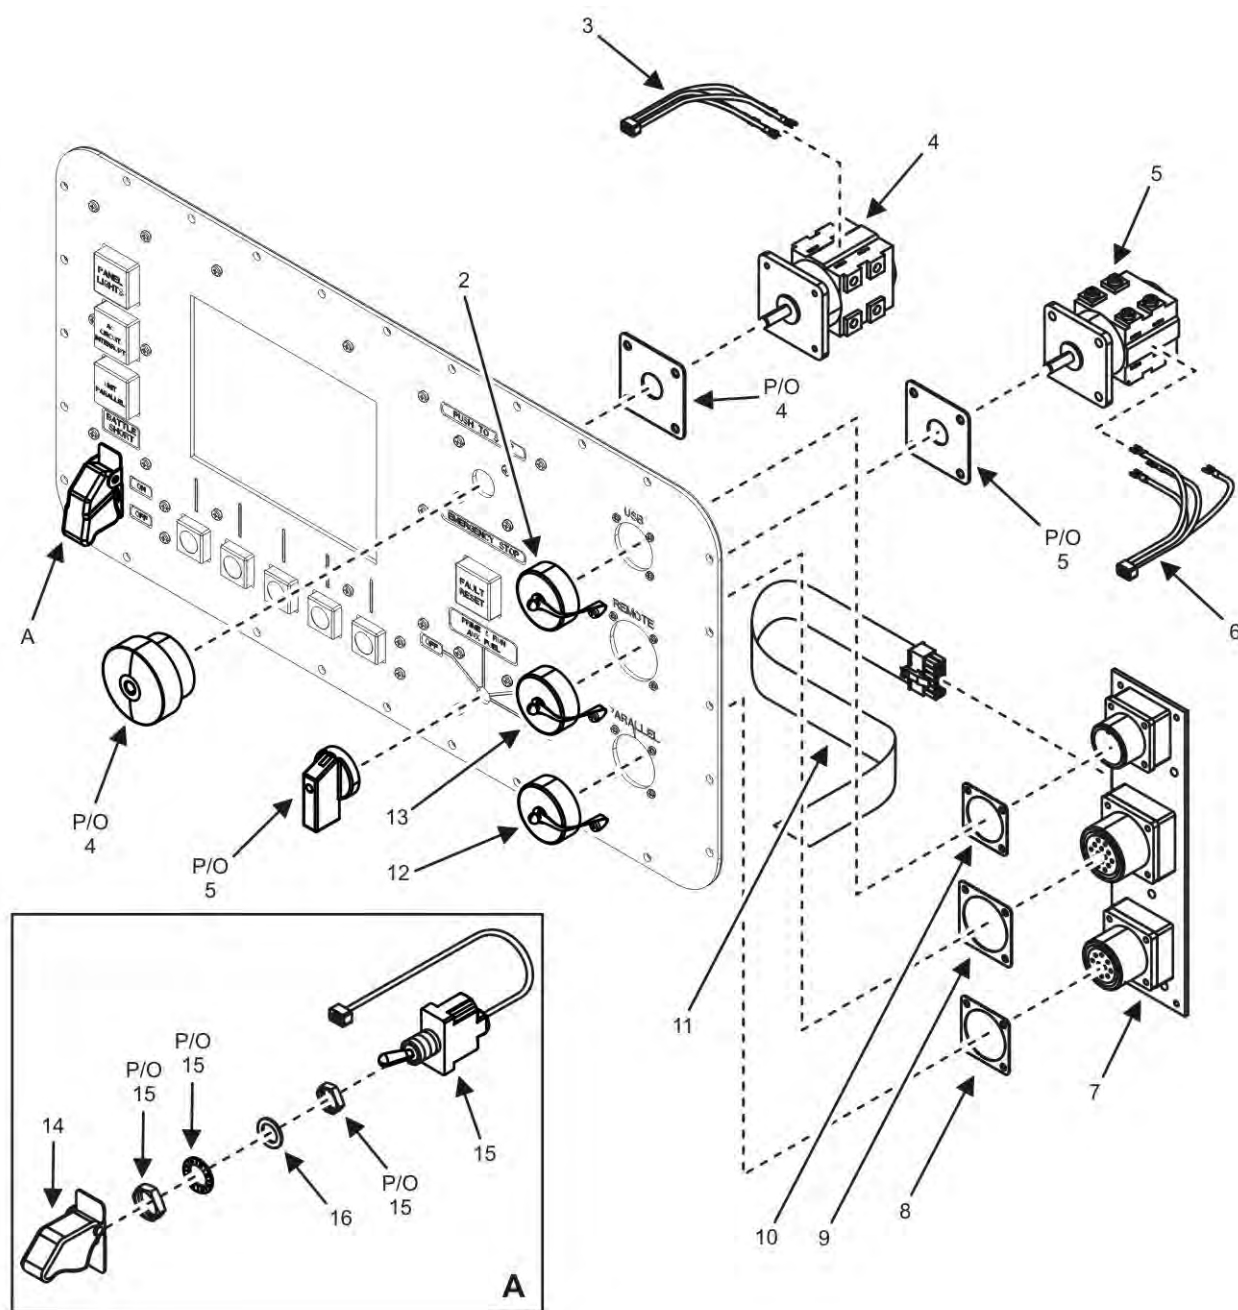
DCS Control Panel Assembly (Sheet 2 of 6).
